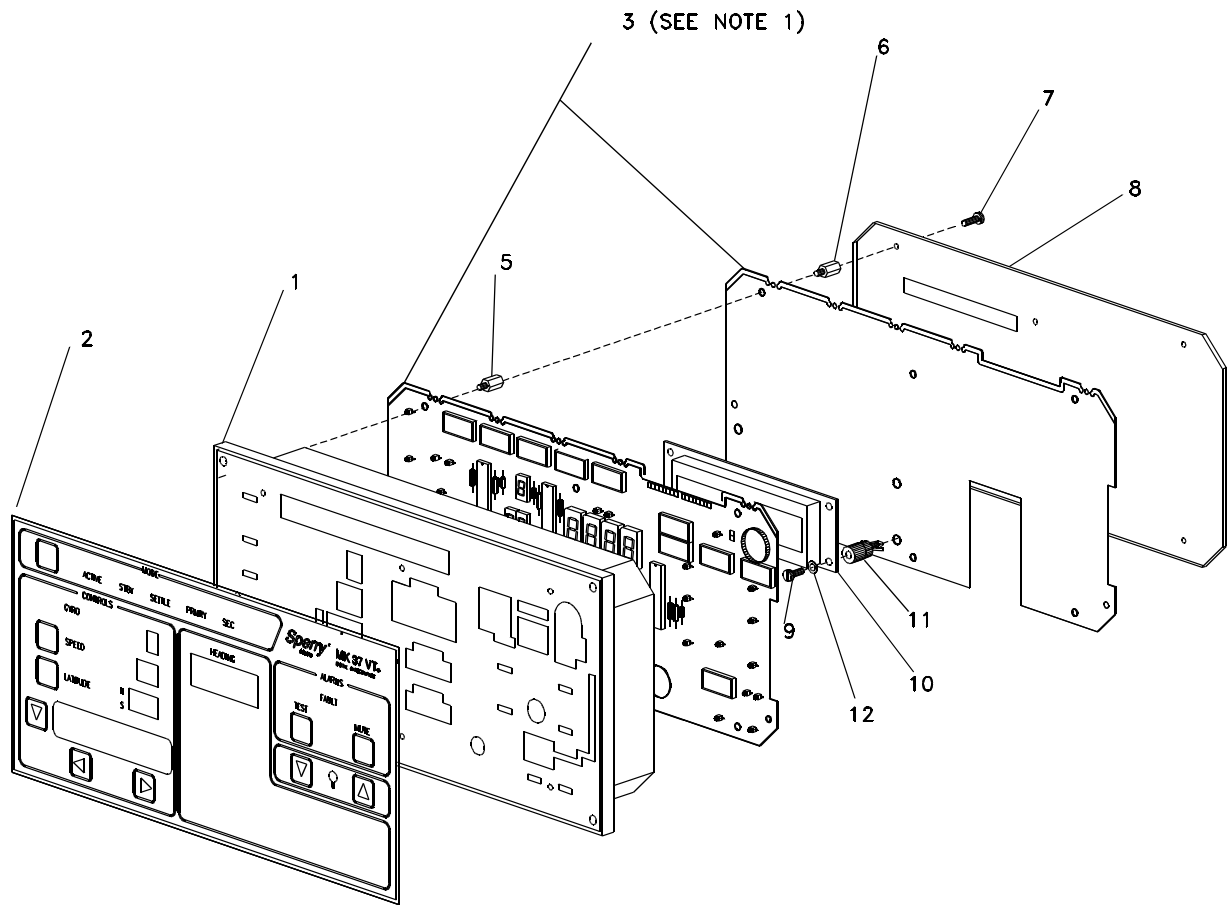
Electronics Control Unit Parts Identification Drawing
